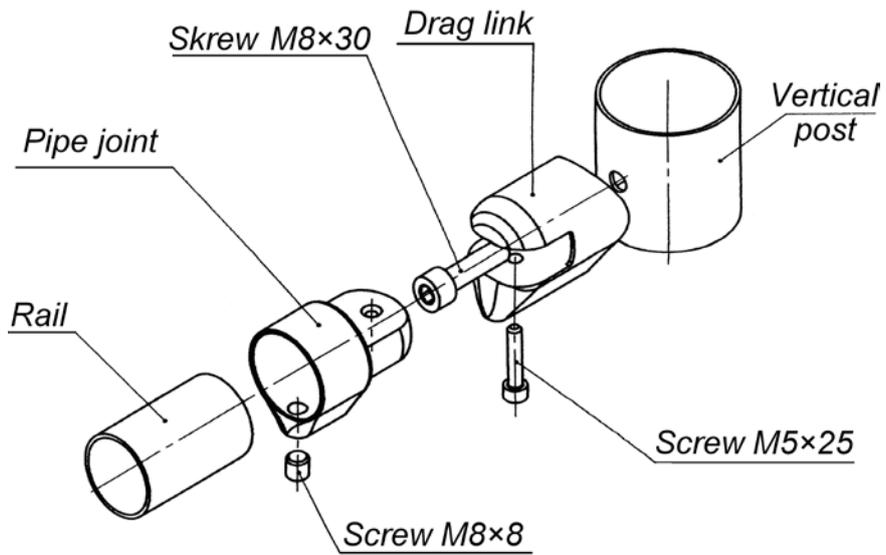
Fastening of rails to posts using BH02 0-11 adjustable coupling fittings
